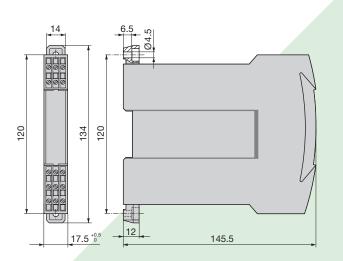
SINEAX TI 807-1.... (housing S17) screw hole mounting brackets pulled out.
